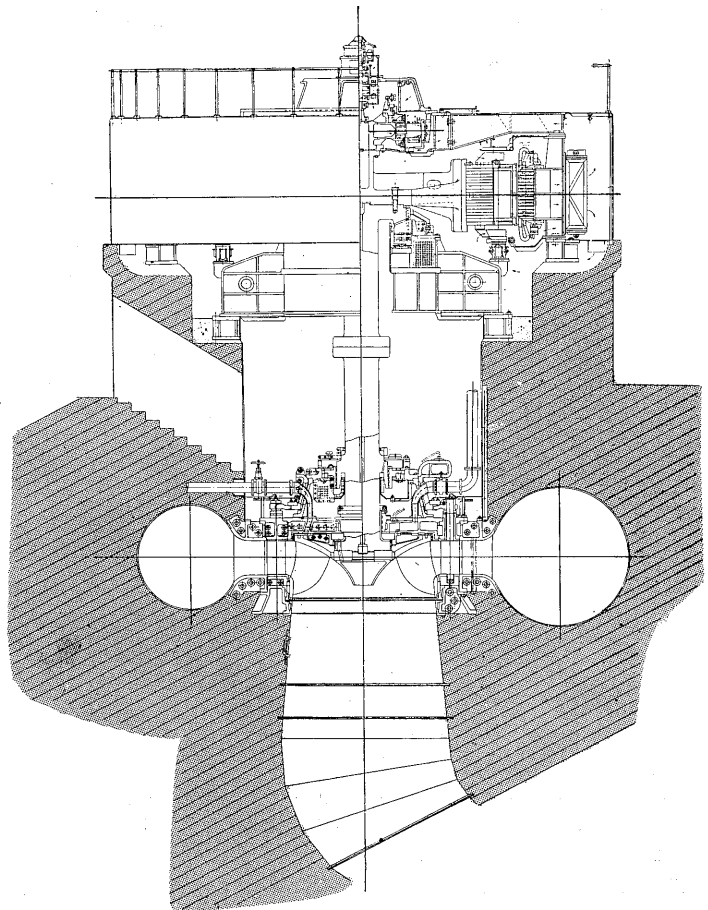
Sectional Drawing of 30,000 kVA Generator and Francis Water Turbine.
